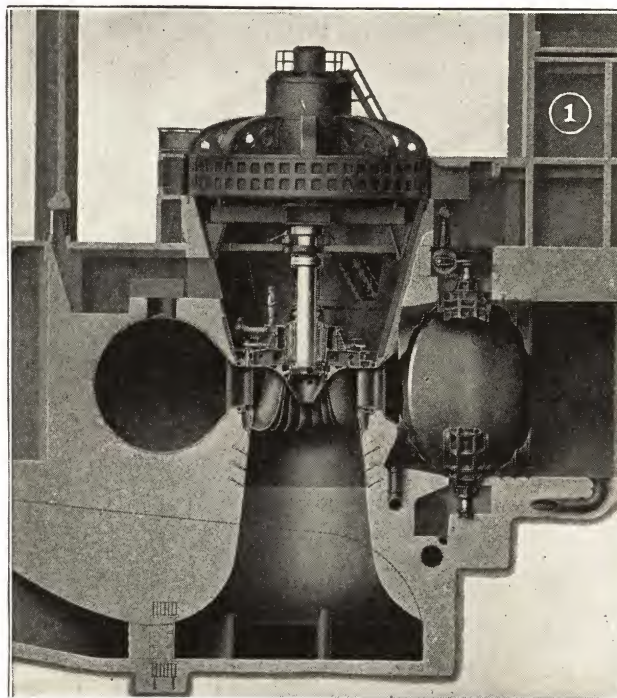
Is a Sectional View through One of the Four 54,000 H.P. 81.8 R.P.M., 89 Ft. Head, Plate Steel Spiral Casing Turbines Built by the Company and Put into Successful Operation in the Conowingo Plant of Susquehanna Power Co. This Sectional View Also Shows One of Four 27 Ft. Diameter Butterfly Valves Designed and Built by the Company and Which Are the Largest Valves of This Type Ever Built
